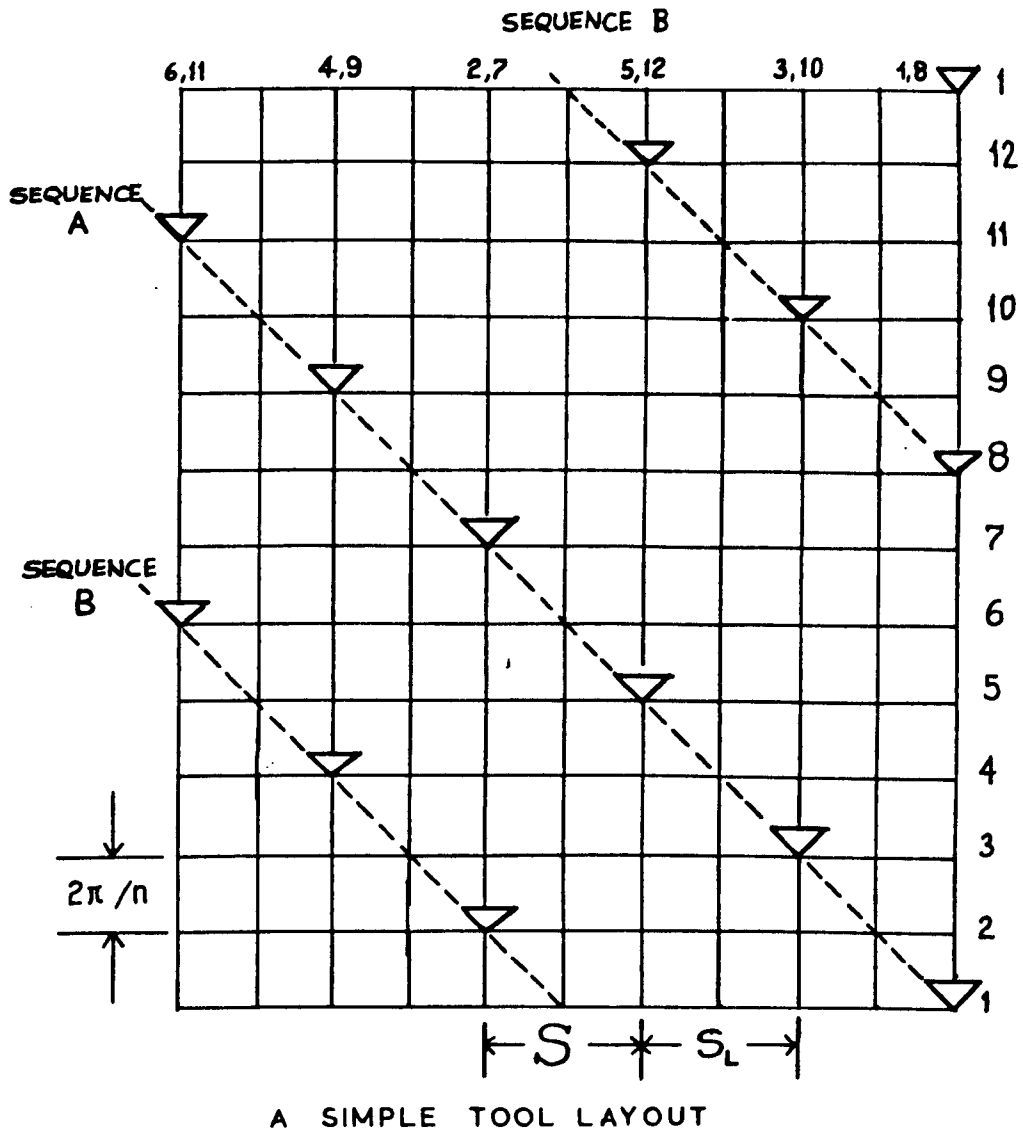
Tool lacing pattern of a simple drum with two tools per line.
